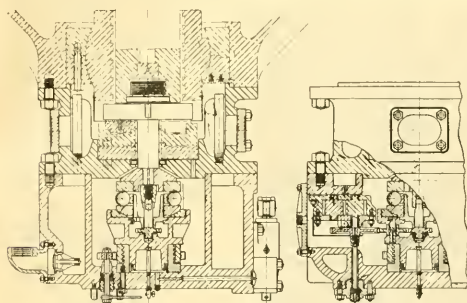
THE KINGSBURY AND THE BALL THRUST BEARINGS
